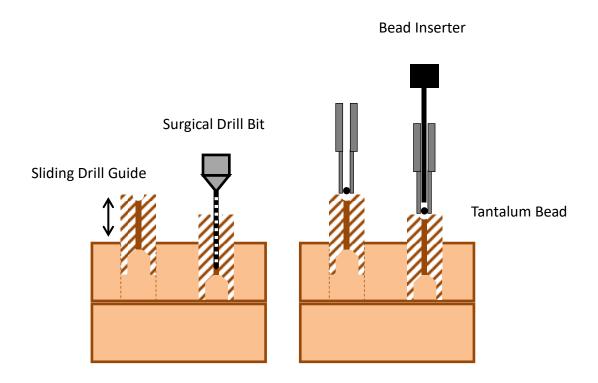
Holding block and drill guide for tantalum bead insertion into glenoid component
